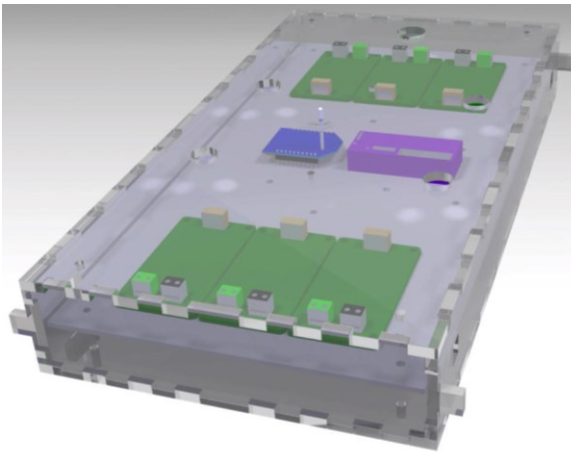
3D CAD FRAME OF ELECTRONIC BOX UP-SIDE
